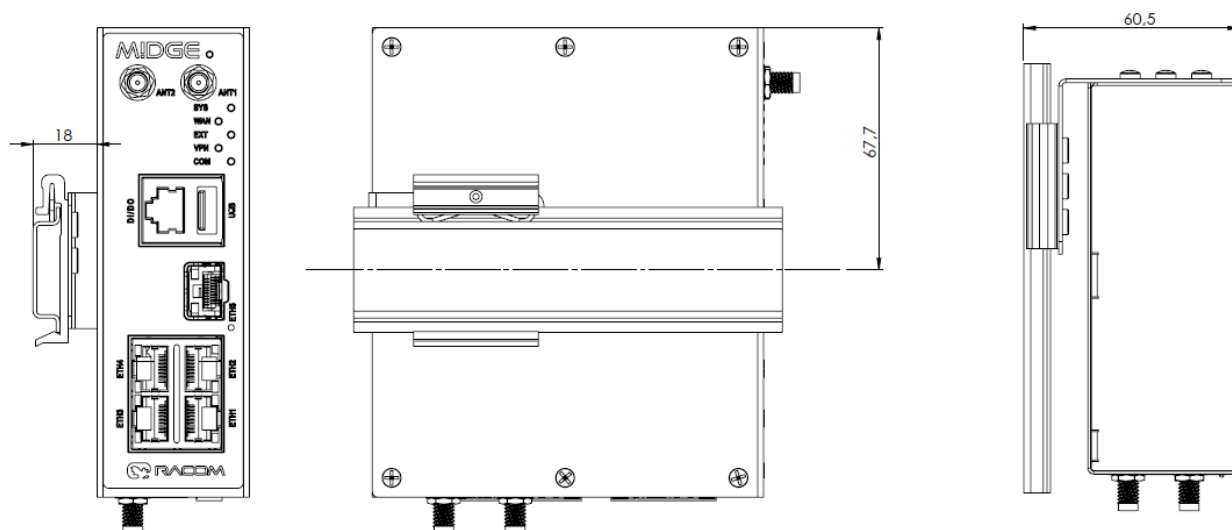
M!DGE3 Edge-bracket dimensions
